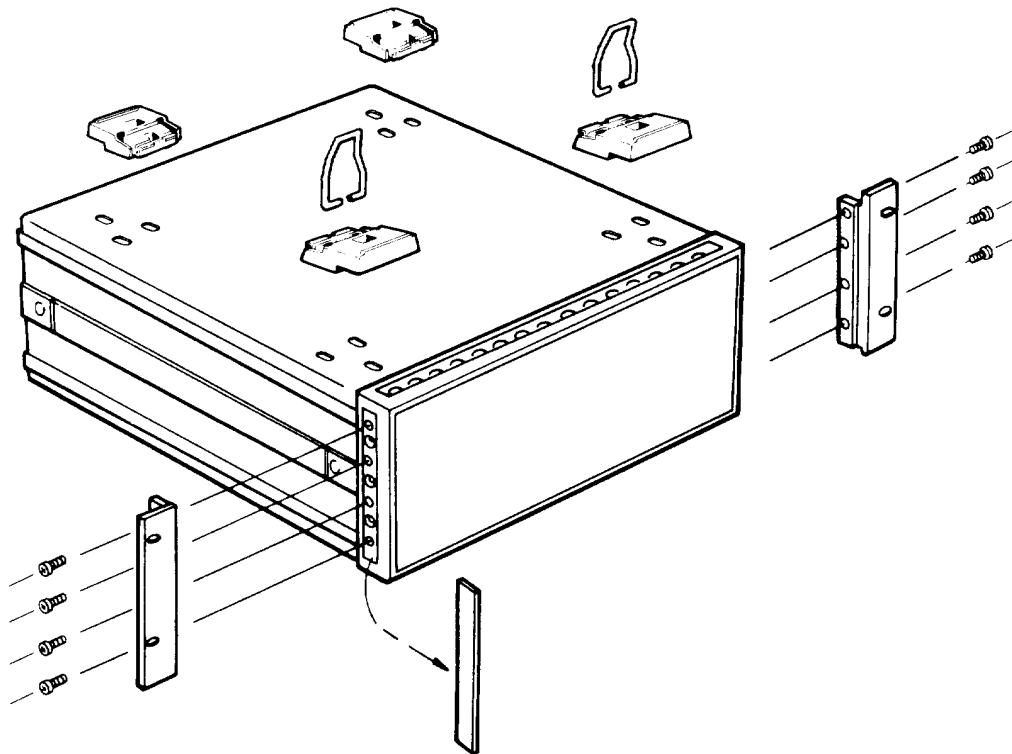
Chassis Slide Kit Mounting Instructions (Option 806) (2 of 2)
